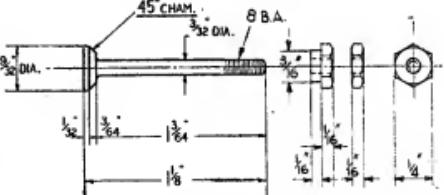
Valves, with adjusting and locking nuts (8 off)
